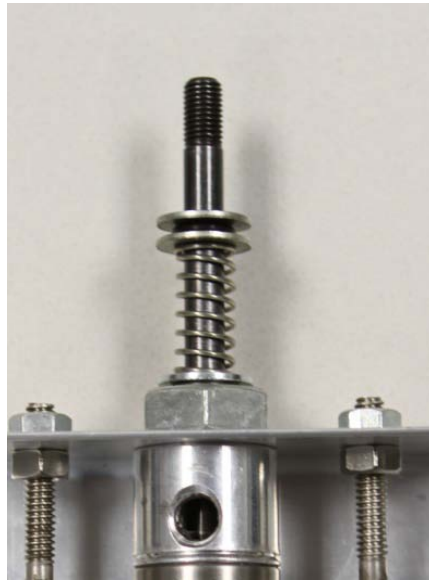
Pneumatic Cylinder Shaft with Spring and O-ring
